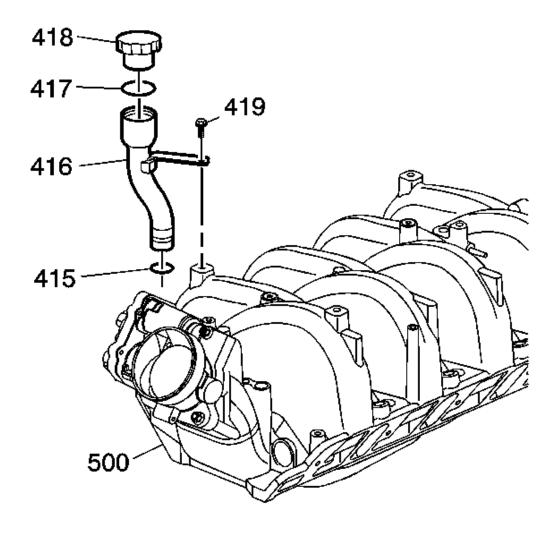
View Of Oil Fill Tube & Components Courtesy of GENERAL MOTORS CORP.
